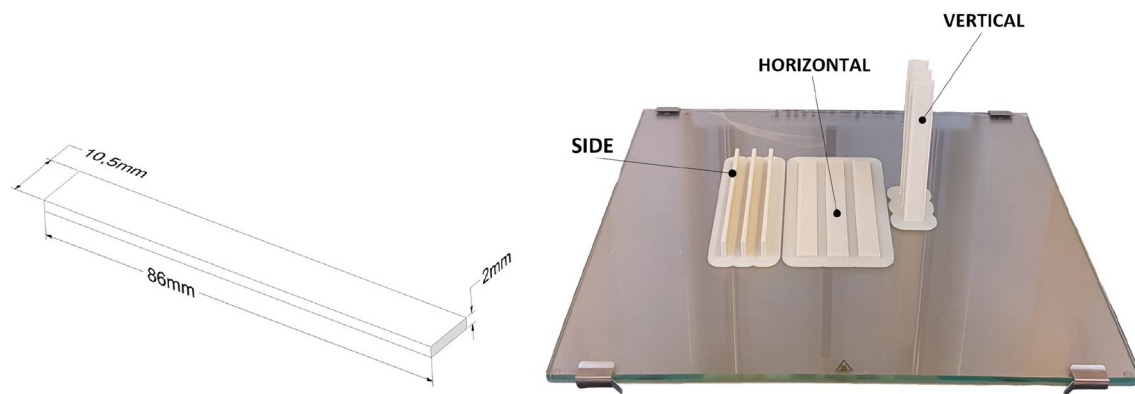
DMA specimen dimensions in accordance with ASTM D5023-15 standards for three-point bending DMA, test and real specimen on the print plate
